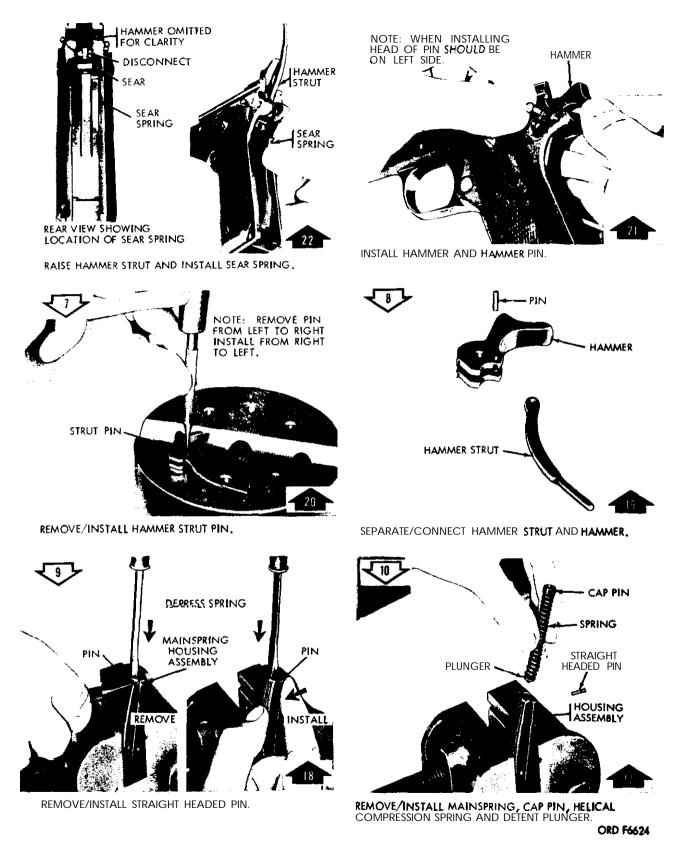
Disassembly/assembly of receiver group (2 of 7).
